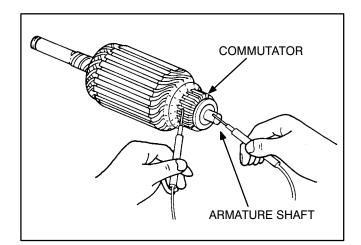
COMMUTATOR TO SHAFT MEASUREMENT
